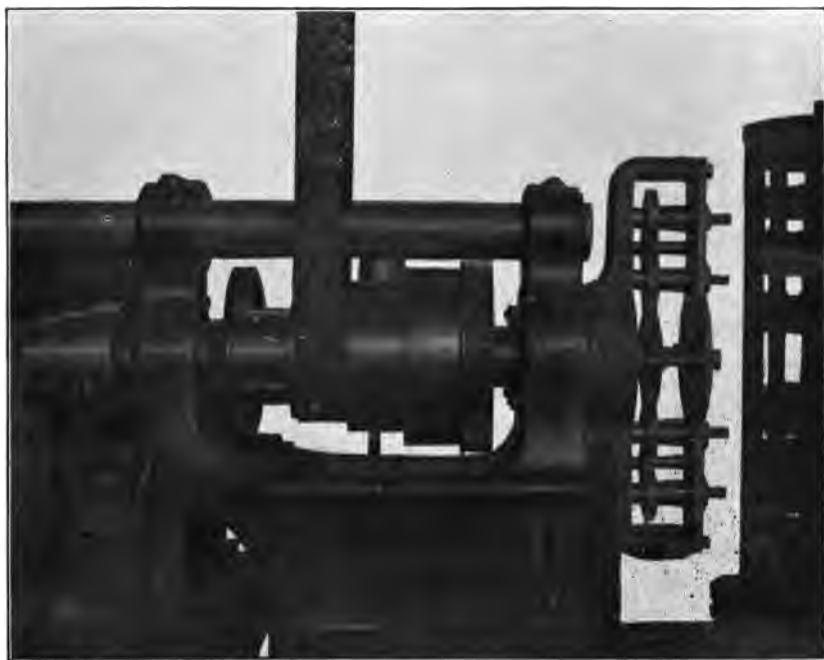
SPECIAL DEVICE FOR MILLING MACHINE, ENABLING FOUR PORTS IN PISTON-VALVE BUSHINGS TO BE MILLED SIMULTANEOUSLY, DEvised BY SUPER-INTENDENT OF SHOP.
